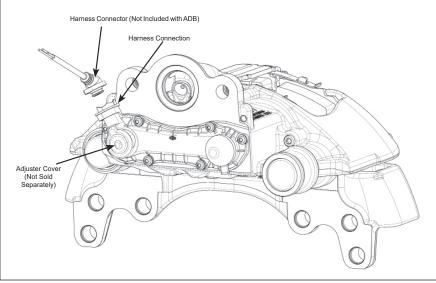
Bendix<sup>®</sup> ADB Continuous (iSense Pro) Wear-Sensing Assembly
